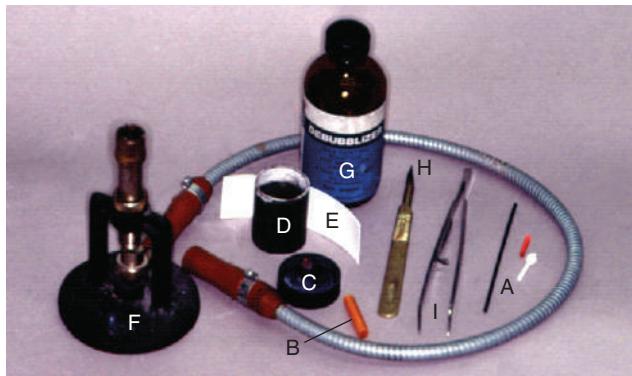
Armamentarium for sprue technique with the wax pattern. A, Sprue; B, sticky wax; C, rubber crucible former; D, casting ring; E, ring liner; F, Bunsen burner; G, pattern cleaner; H, scalpel blade; I, forceps.
